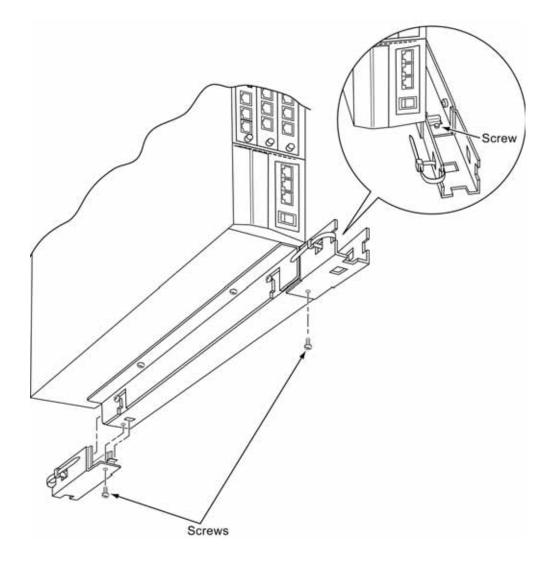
Attach Cable Support Bracket to Lower Wall Mount Bracket
